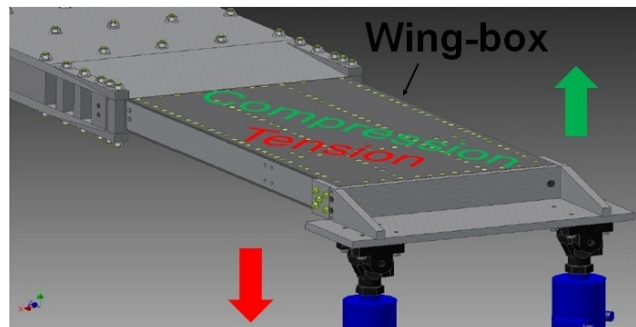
Test setup of wing-box assembly (Platform 2) showing loading directions and consequent induced force in the top skin where the flange of the spar with the crack was attached
